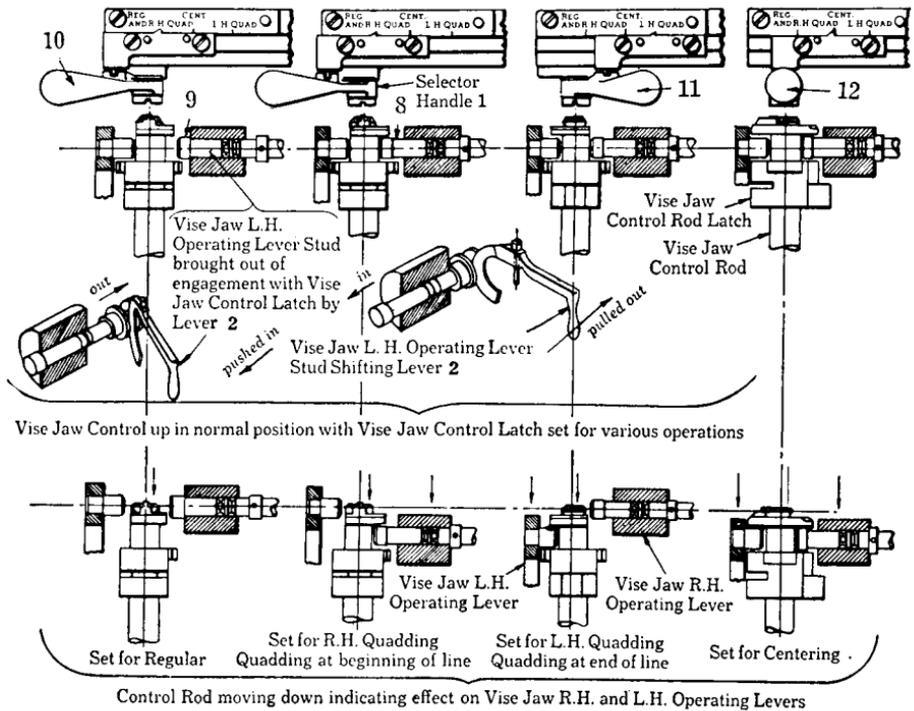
View showing position of the vise jaw control rod latch with respect to position of selector handle.
